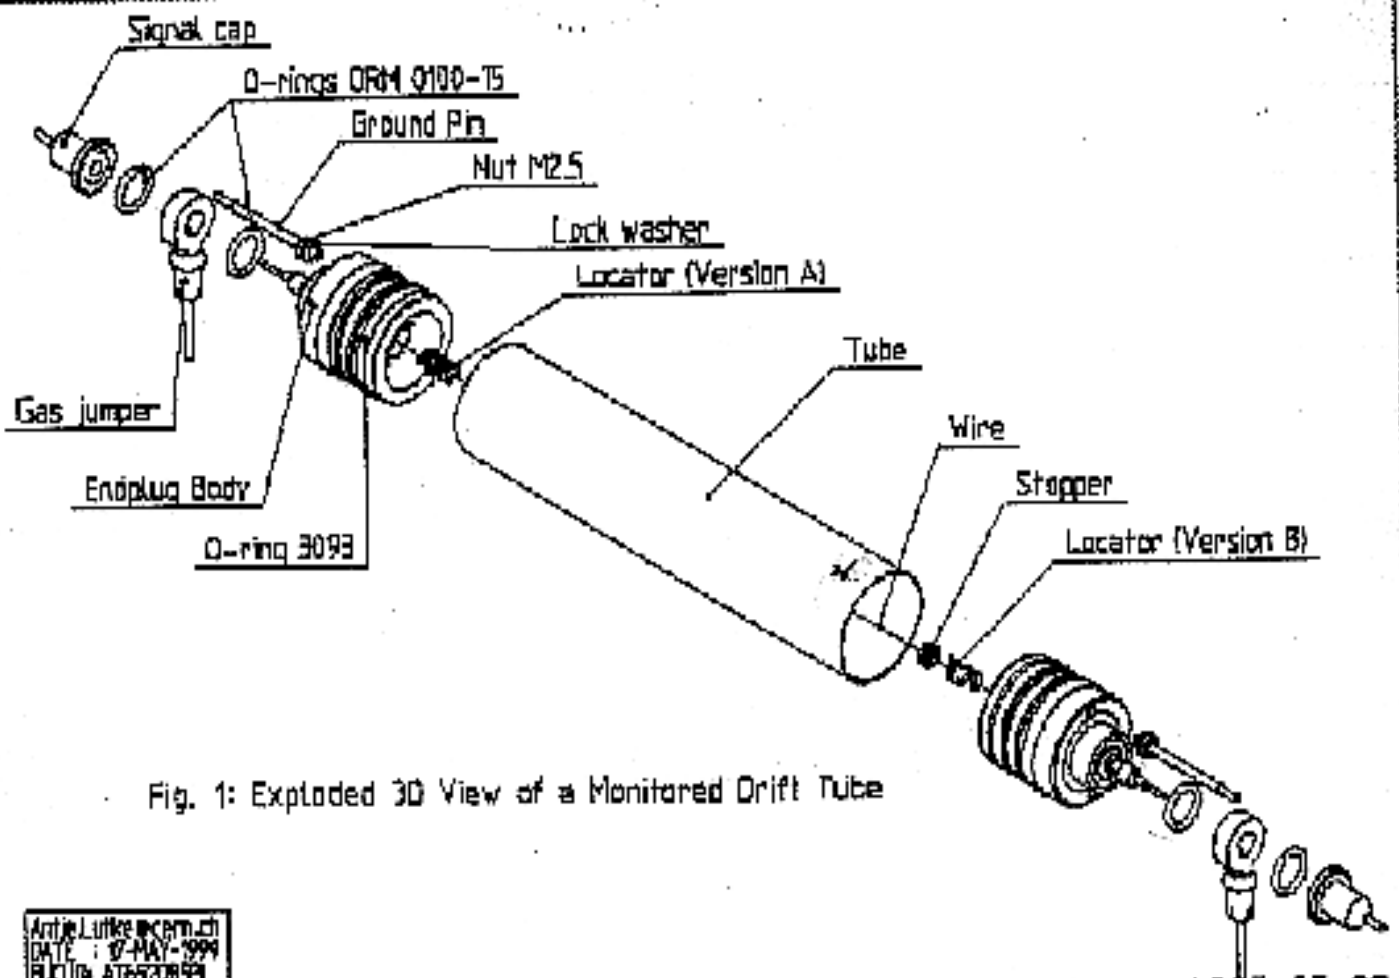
Exploded 3D View of a Monitored Drift Tube
